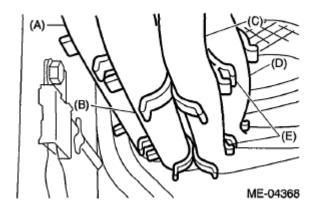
Identifying Vacuum Hose And Clip Courtesy of SUBARU OF AMERICA, INC.
